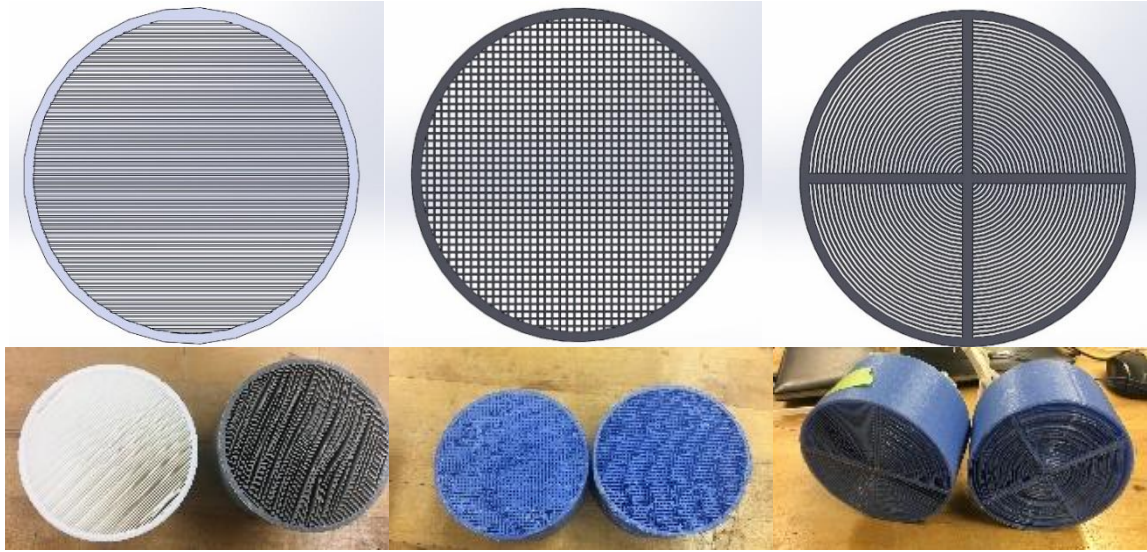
CAD design (on top) and 3D printed (on bottom) for different design stacks.
